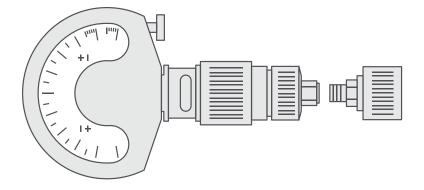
Connector gauges are important to ensure that mechanical dimensions are within the tight tolerances that provide a reasonable impedance match.
